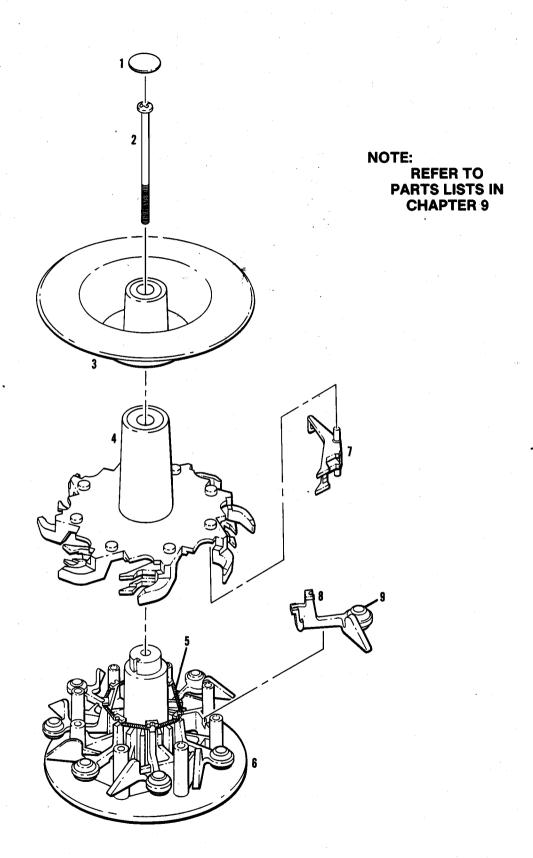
Pen Carousel Assembly, Illustrated Parts Breakout
